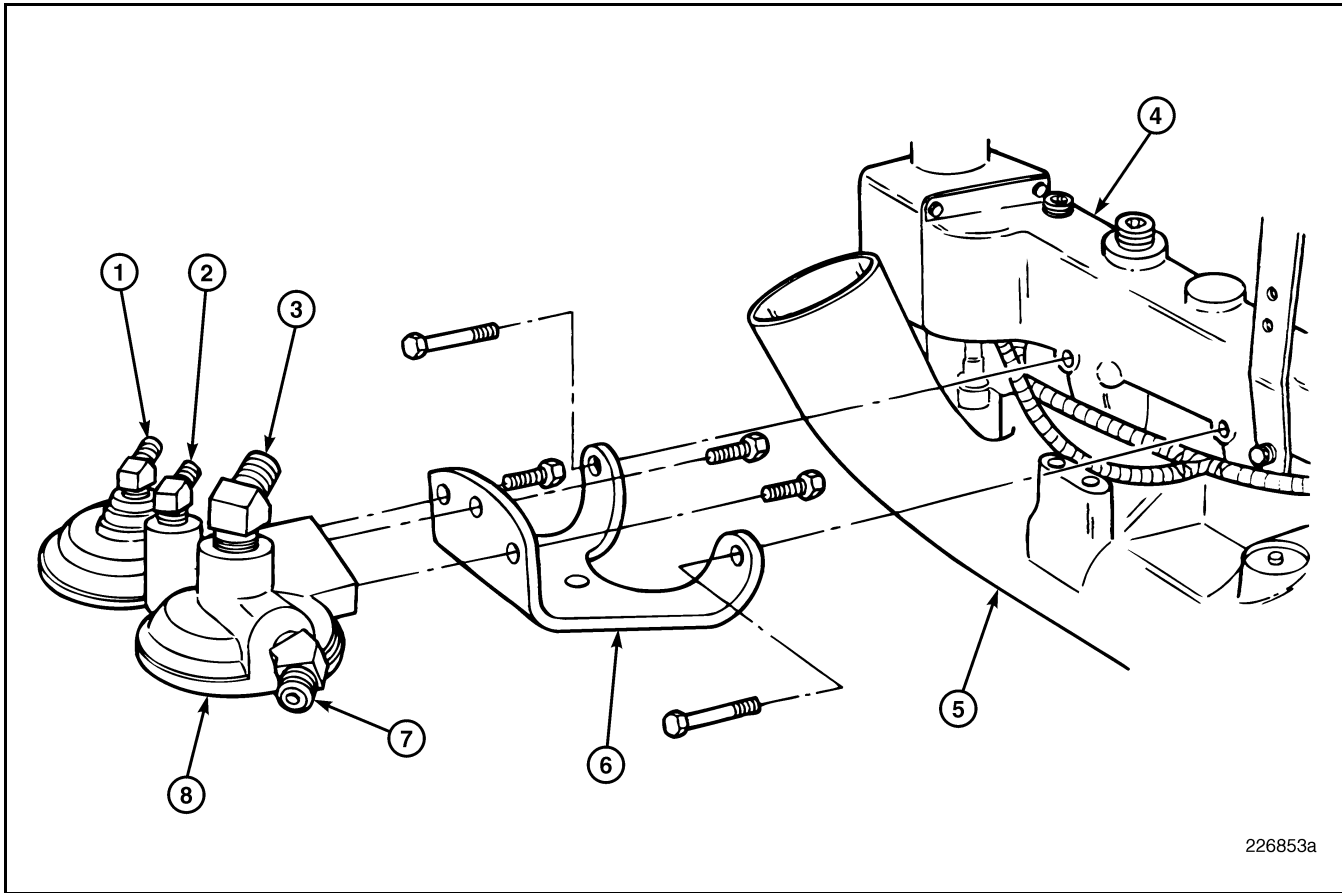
Fuel Filter Adapter Installation with One-Piece Inlet Manifold
